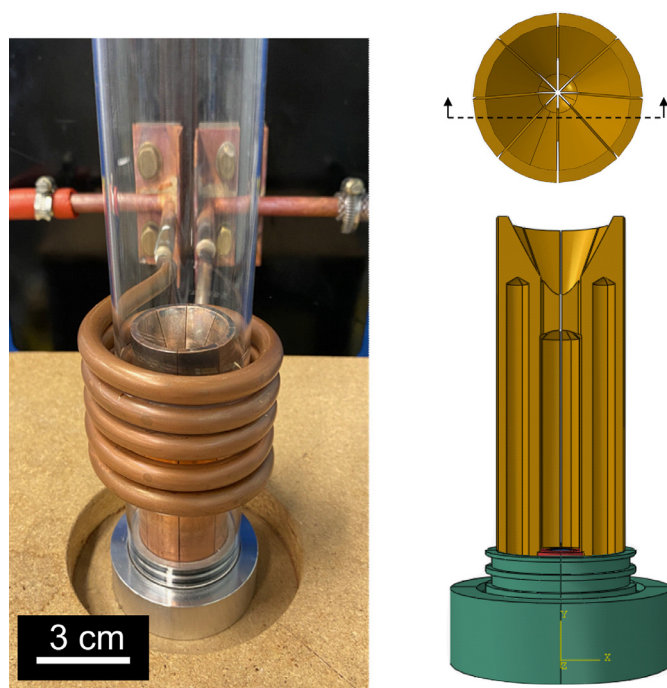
Photograph and cross-section schematic of the cold crucible set-up used for the fabrication of inclusion-containing iron samples.
